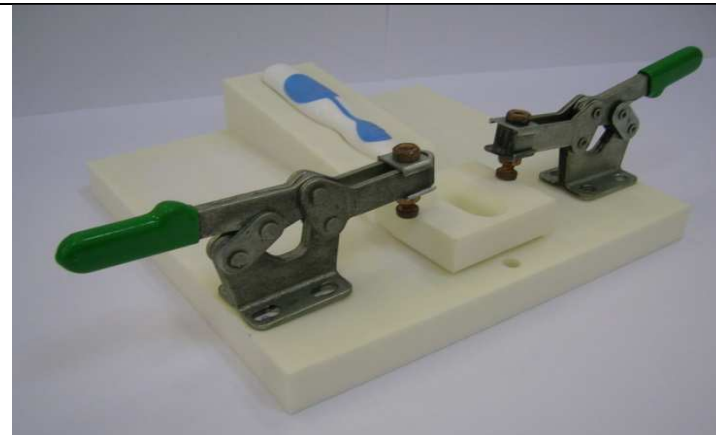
Toothbrush fixture plate with product and assembly mount clamped
